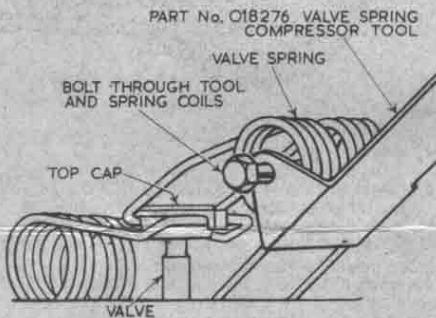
Use of valve spring compressor. Engage spring in groove in top cap. Insert bolt through holes in tool and coils of springs. Pull upwards and outwards until open ends of springs can be rested on seat, then press down spring. Maintain pressure with fingers, remove bolt and tool, then finally press spring prongs home.
